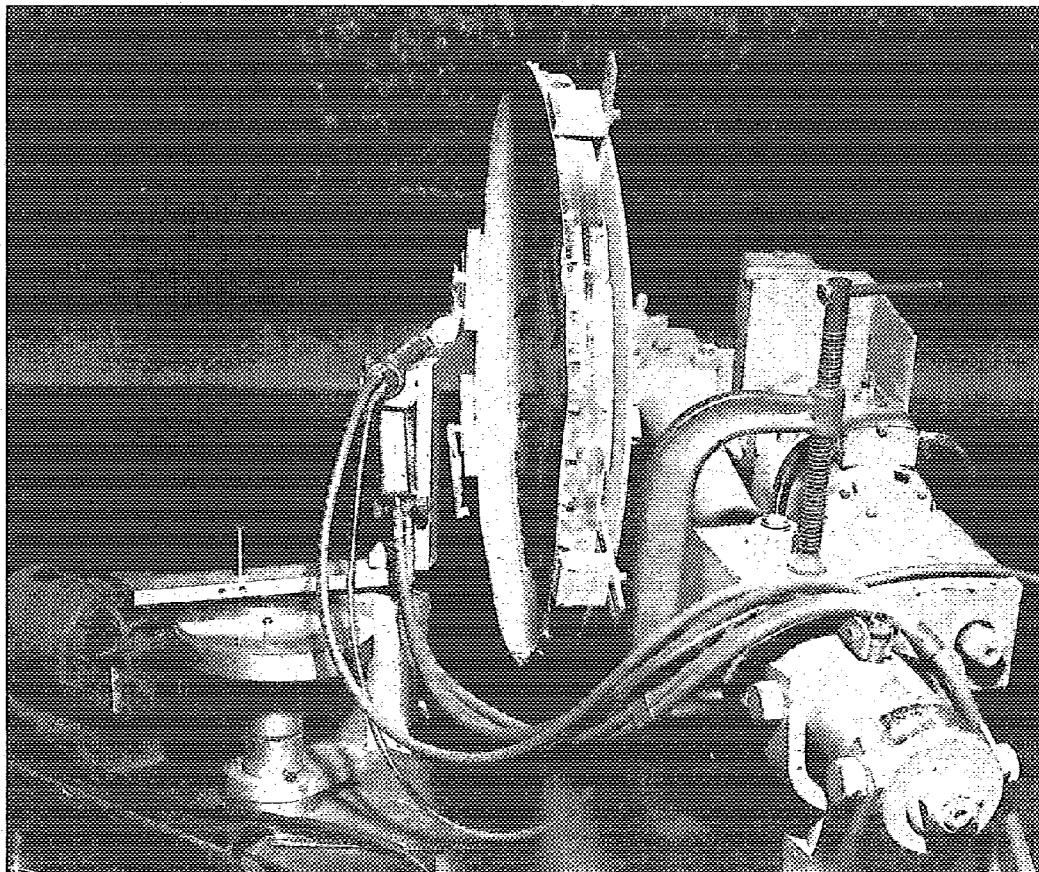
C — Use of a welding positioner to rotate parts oriented vertically or horizontally. A variable speed (zero-max) drive unit is being used to oscillate the flame spray gun
